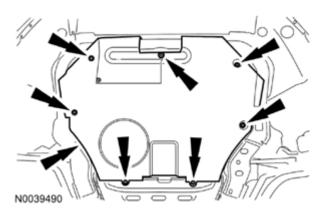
Locating Underbody Cover And Screws Courtesy of FORD MOTOR CO.
